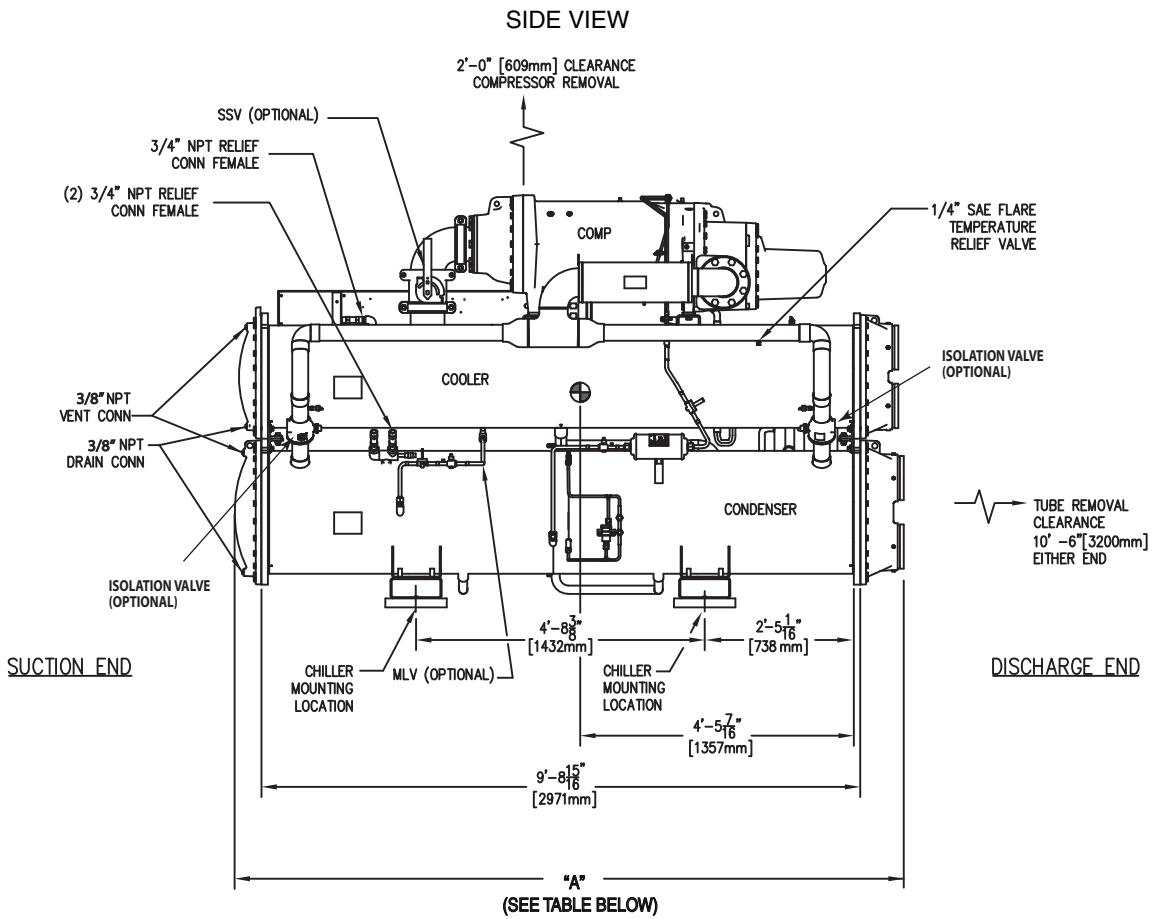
30XW225-300 Unit Dimensions (cont)
